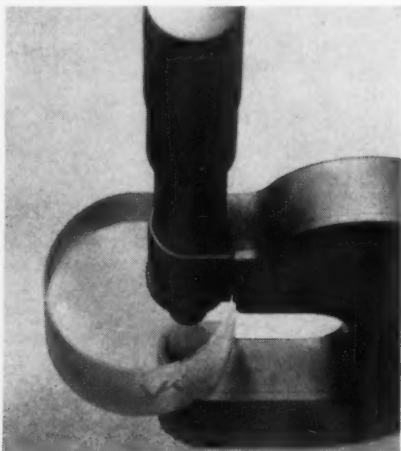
Probably the best technique for detecting anvil parallelism error on micrometers is to use an optical flat, as shown here, and count the interference bands.
